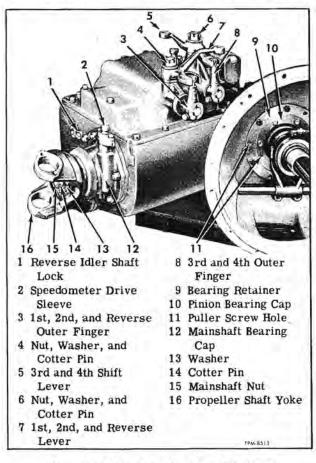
Transmission Showing Shift Levers and Propeller Shaft Yoke
